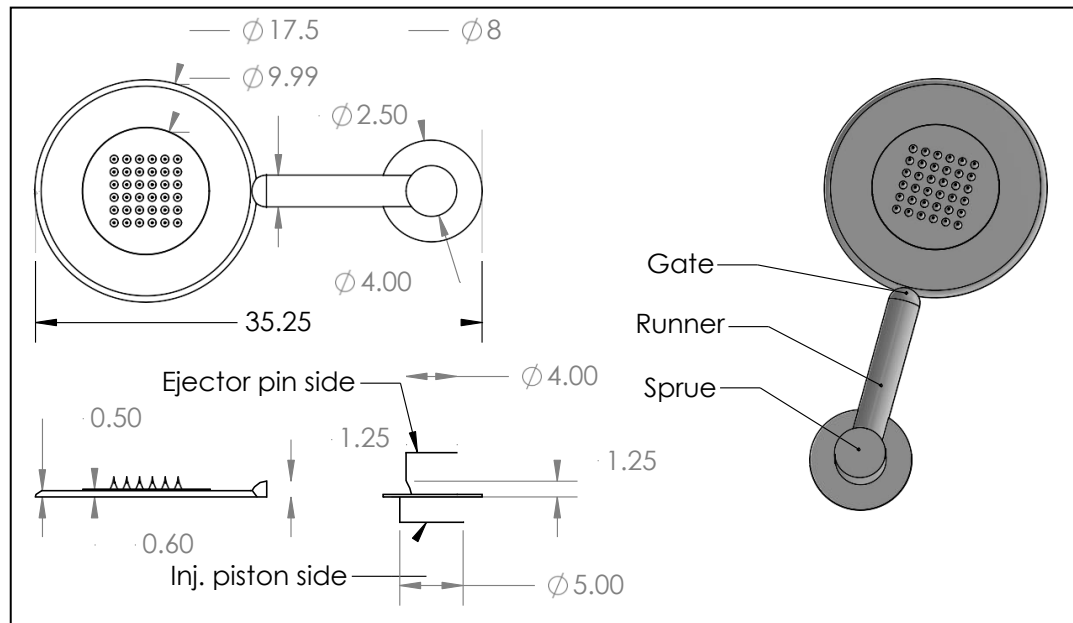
Dimensions of the microneedle component for conventional micromoulding tool design.
